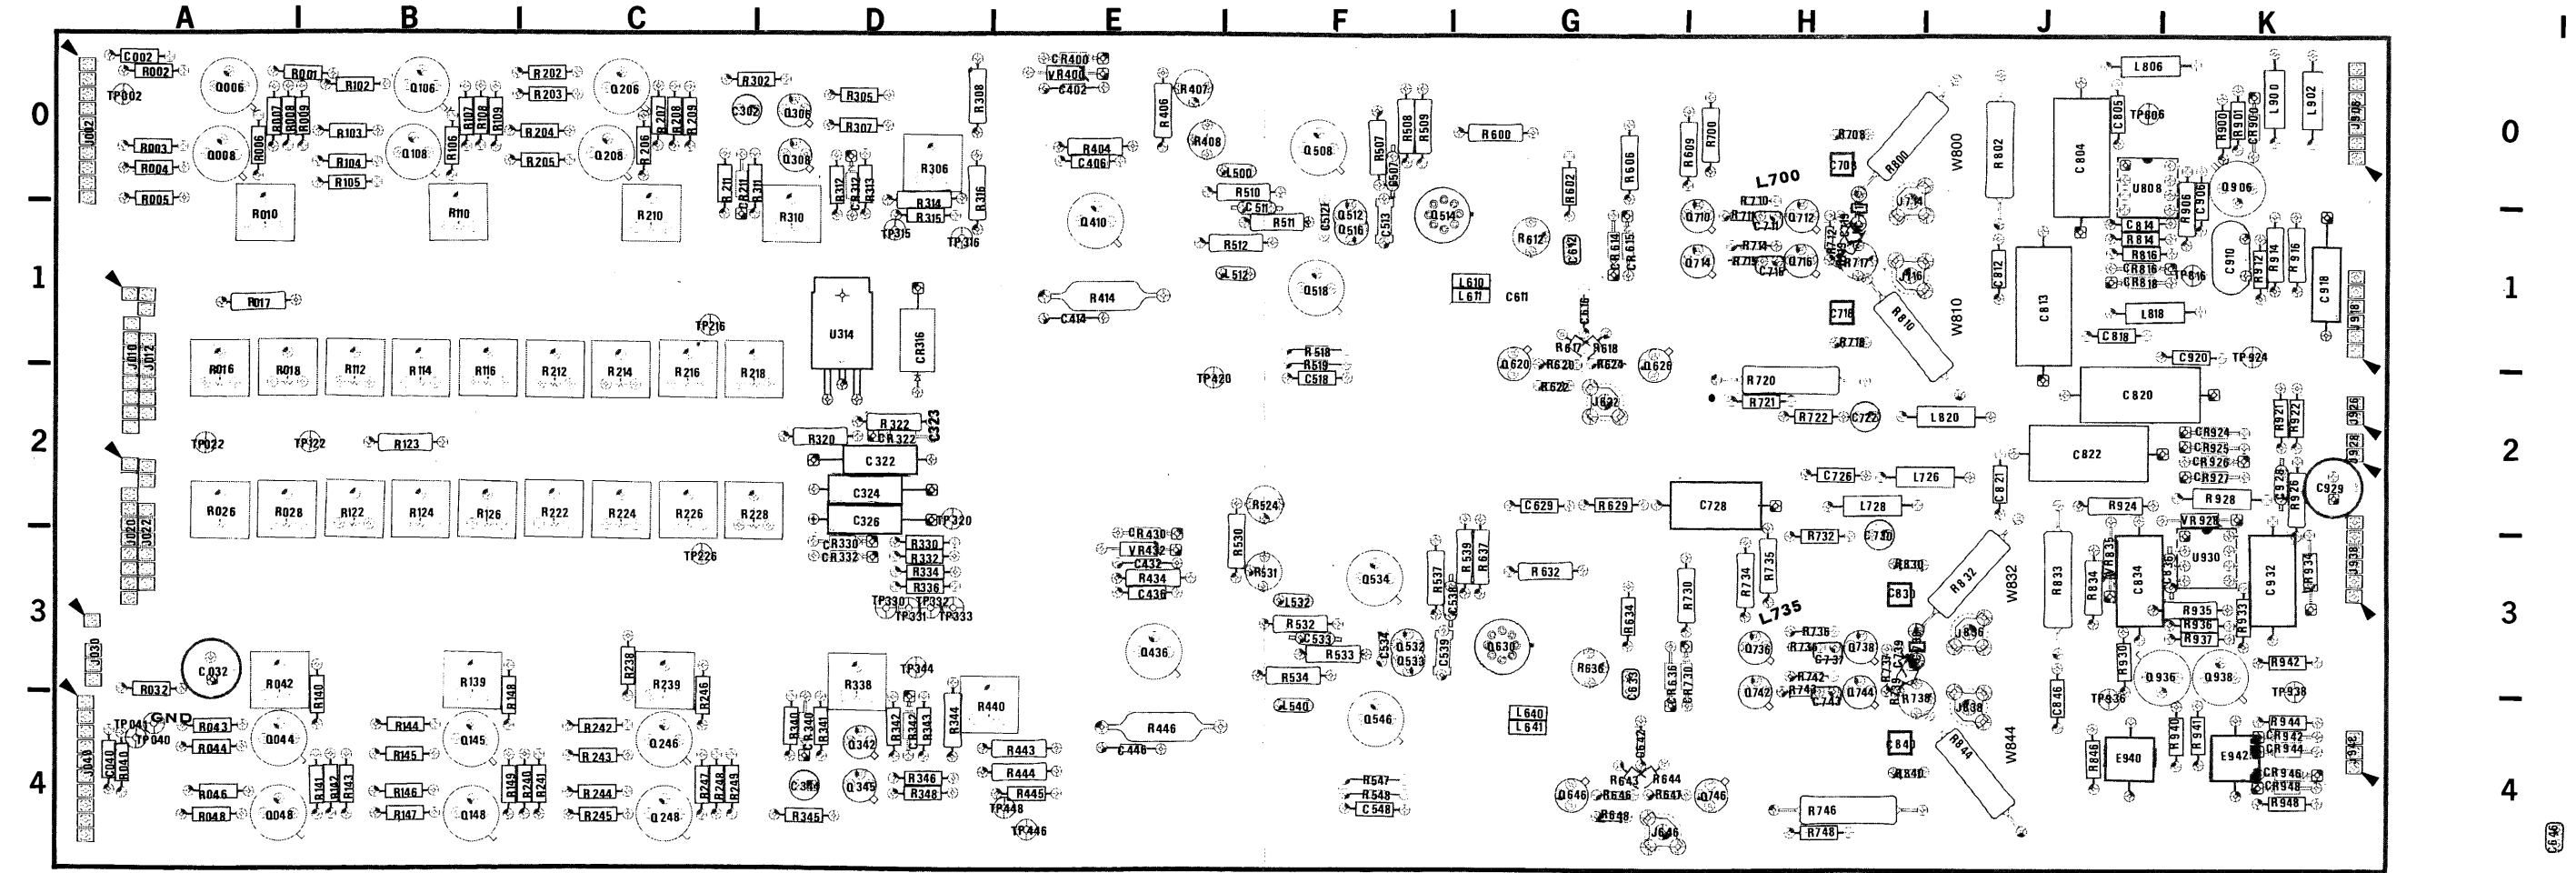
Deflection Amplifier circuit board, assembly A26.
